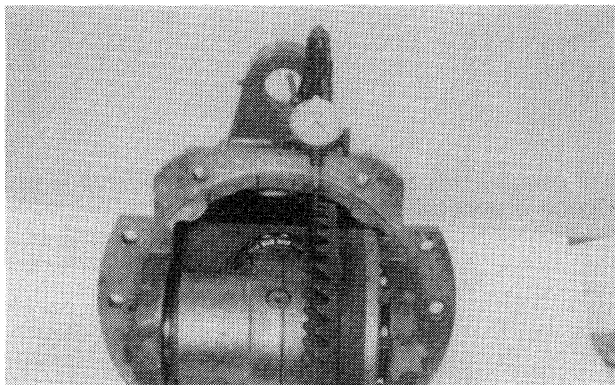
Position dial indicator against tooth of ring gear to measure ring gear to pinion backlash. Recommended backlash is 0.007-0.009 inch (0.18-0.23 mm).
